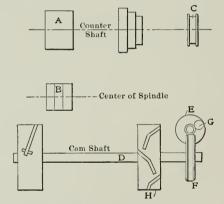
Diagram of Spindle and Cam-Shaft Drive
